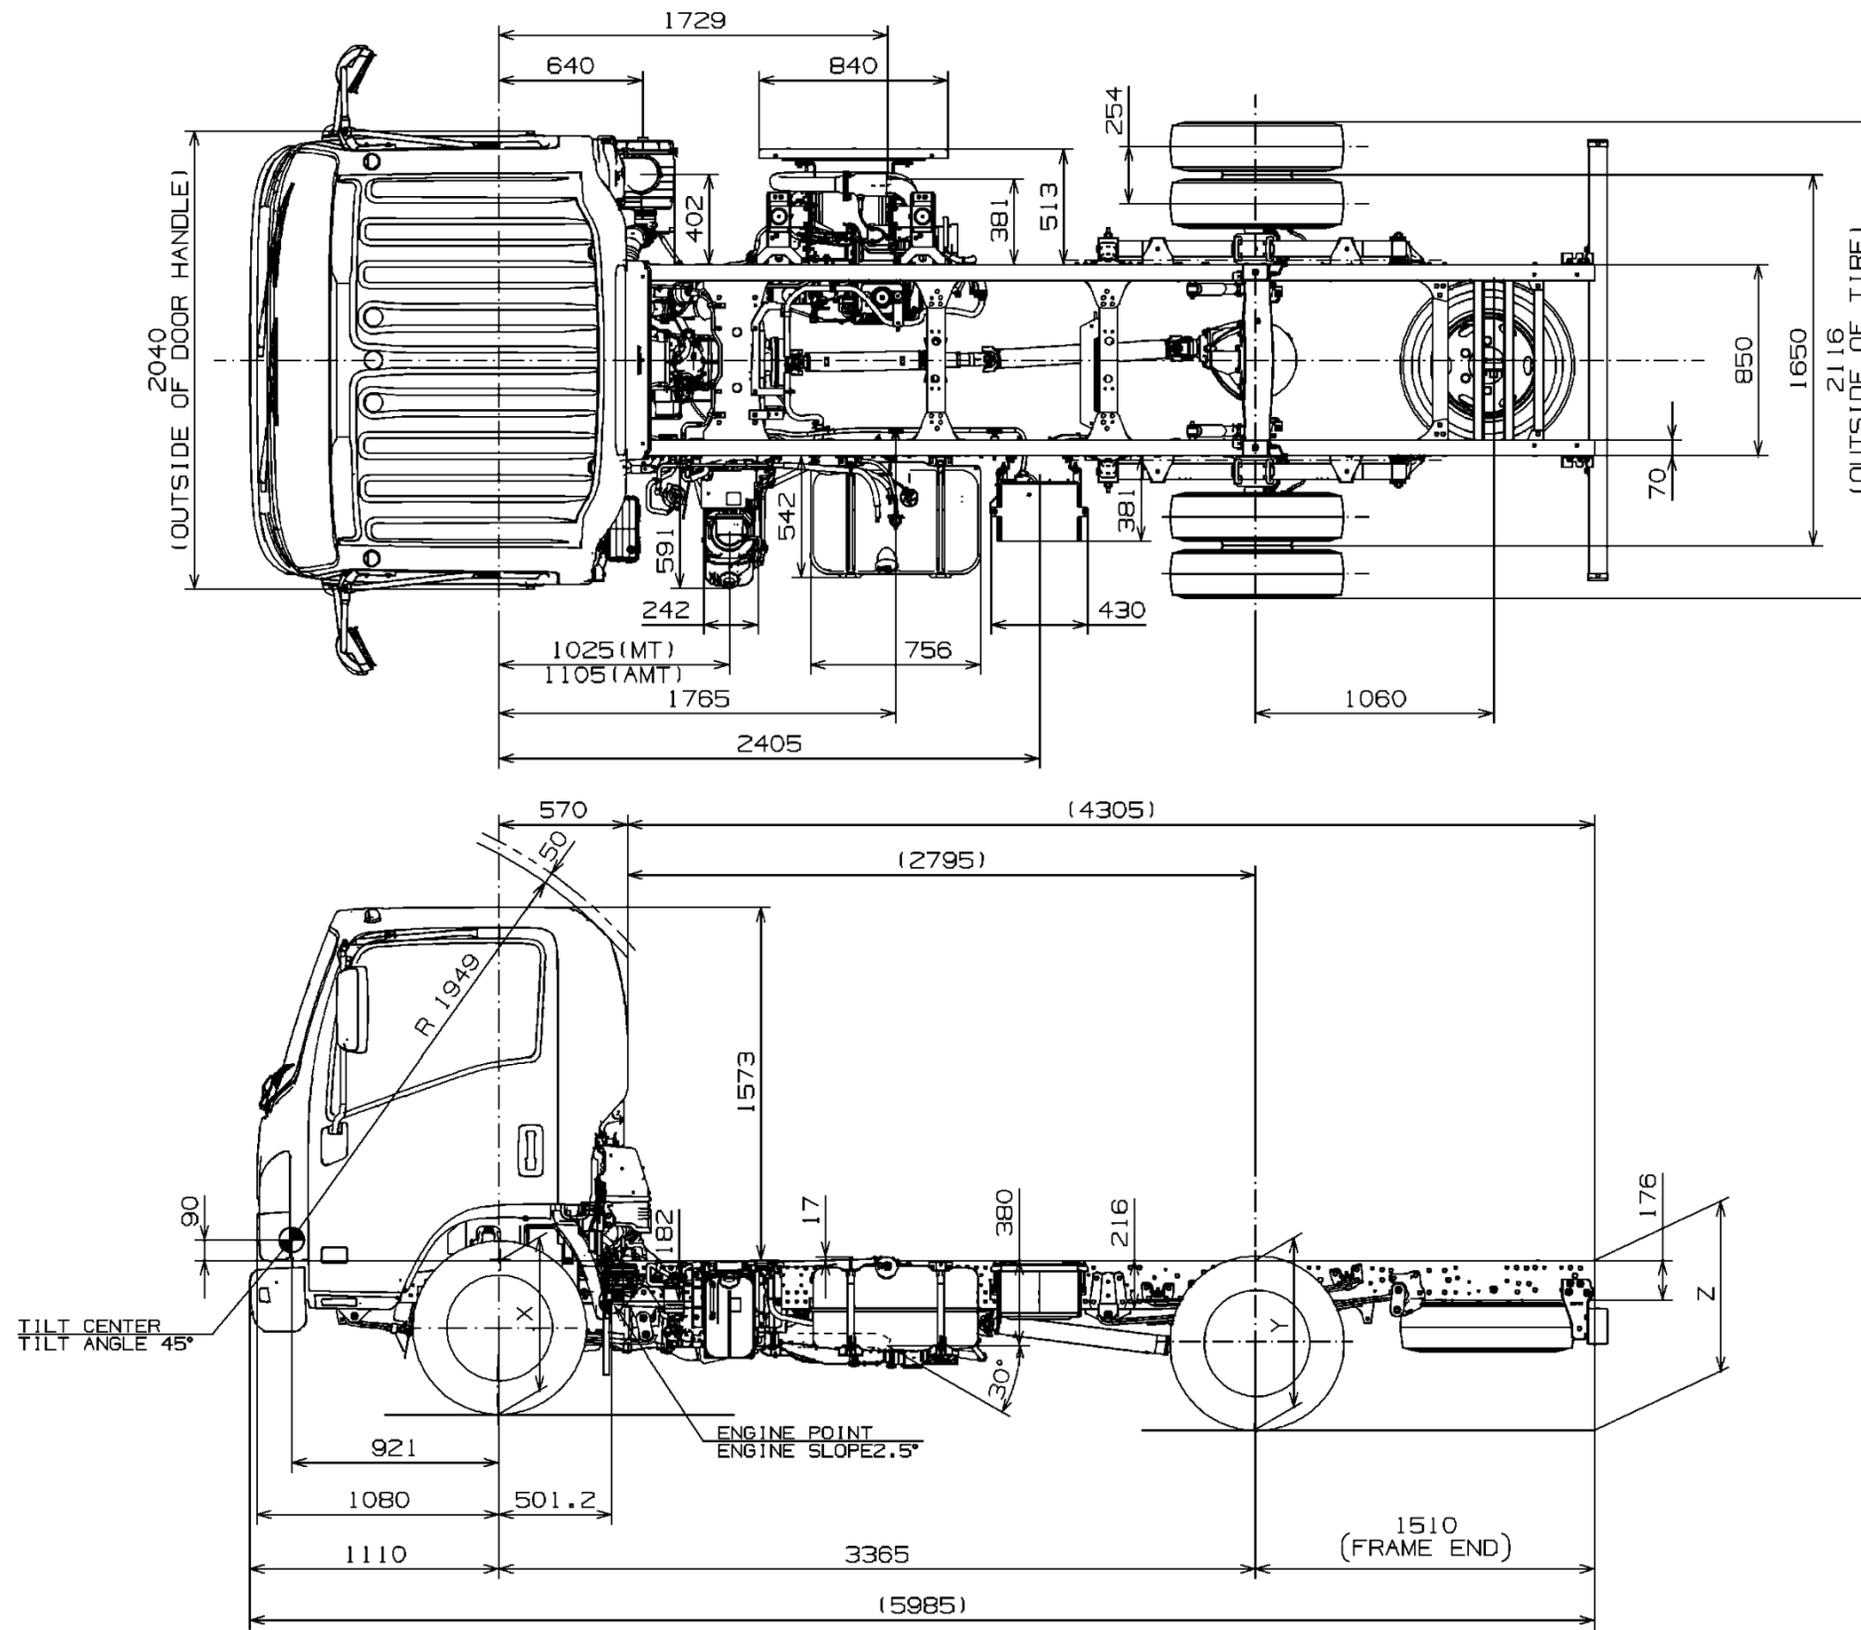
Cab Chassis Drawing NPR85L/U-KJ5AYE
